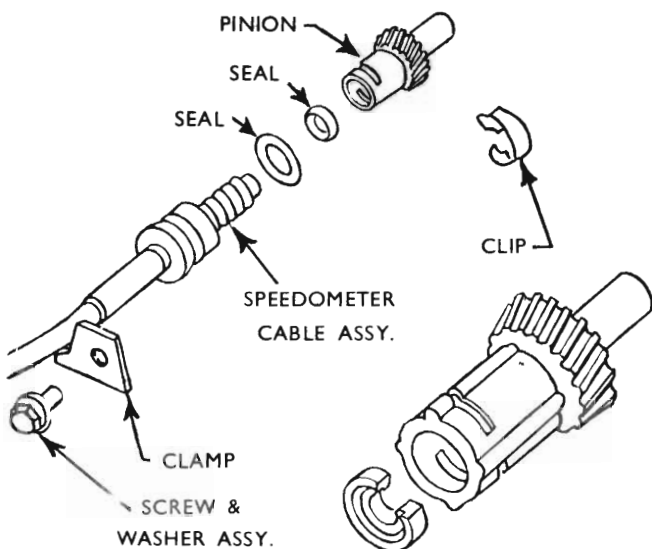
Speedometer drive pinion assembly—disassembled view
